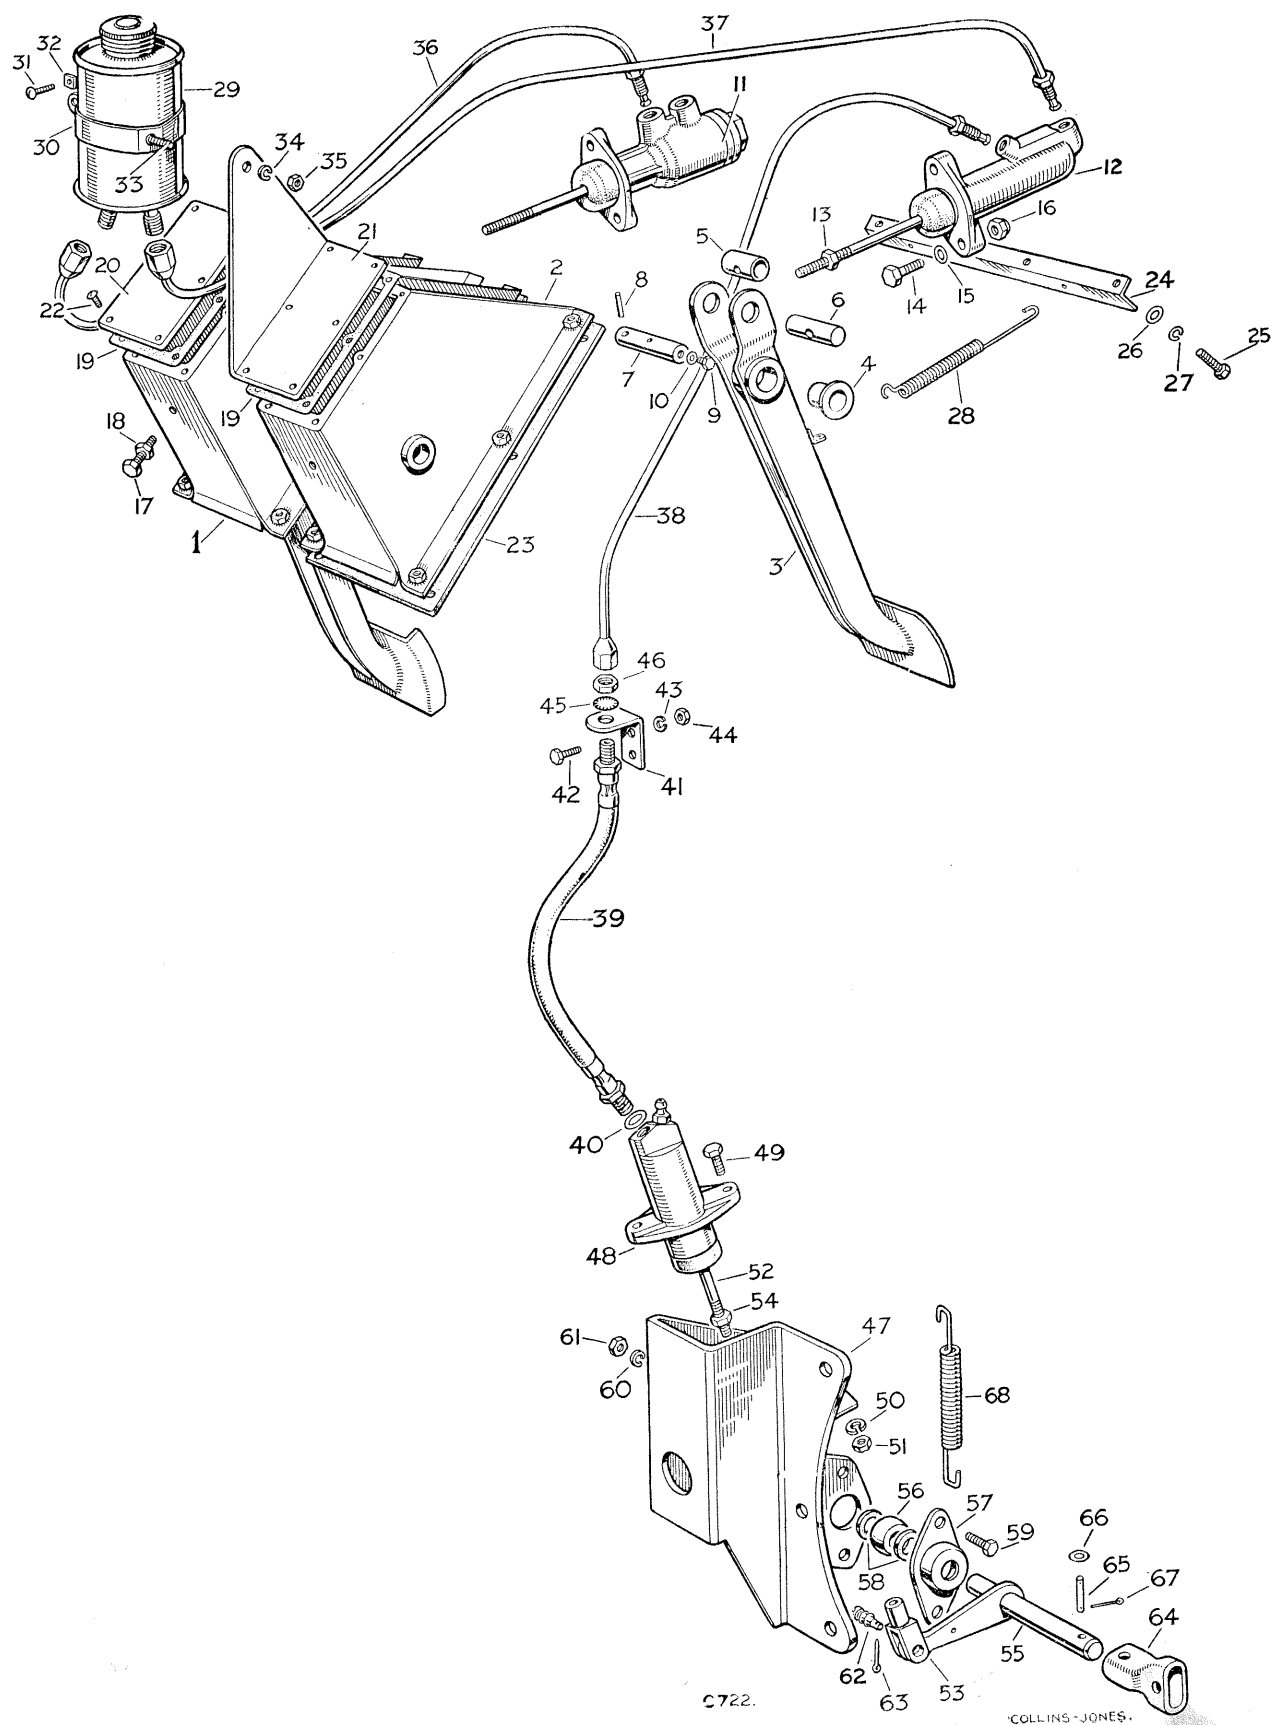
Layout of clutch master cylinder, slave cylinder and pedal unit
